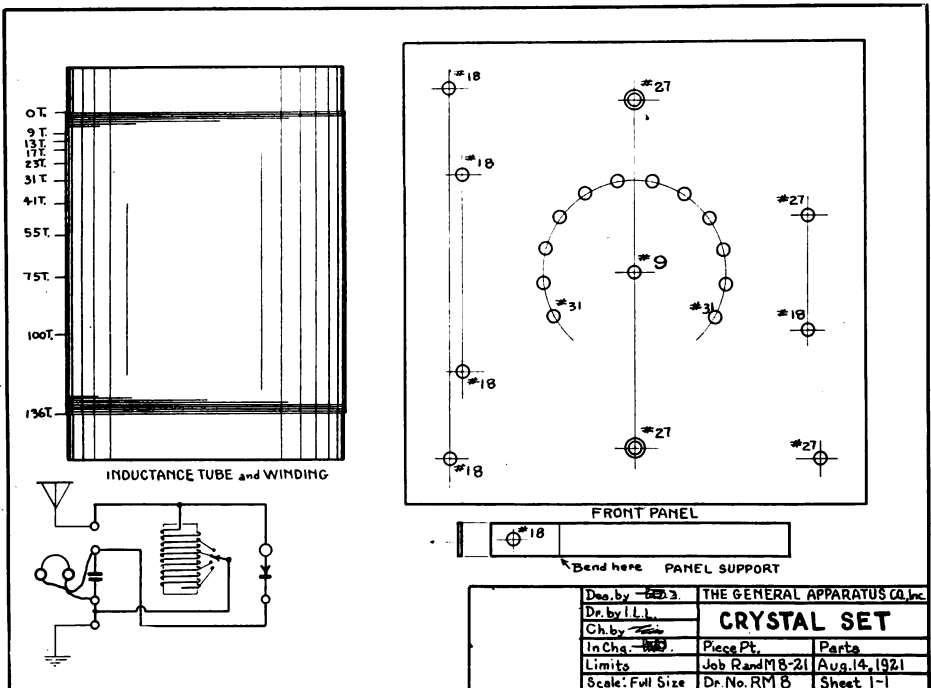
Exactly one-half size. Showing the parts and the wiring of the completed outfit.
